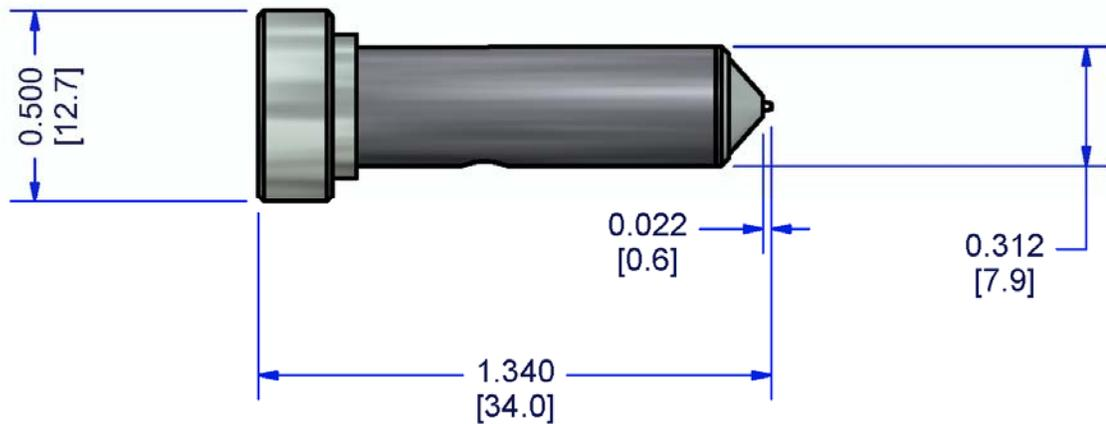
MJ-SF-04 physical dimensions (in / mm)
